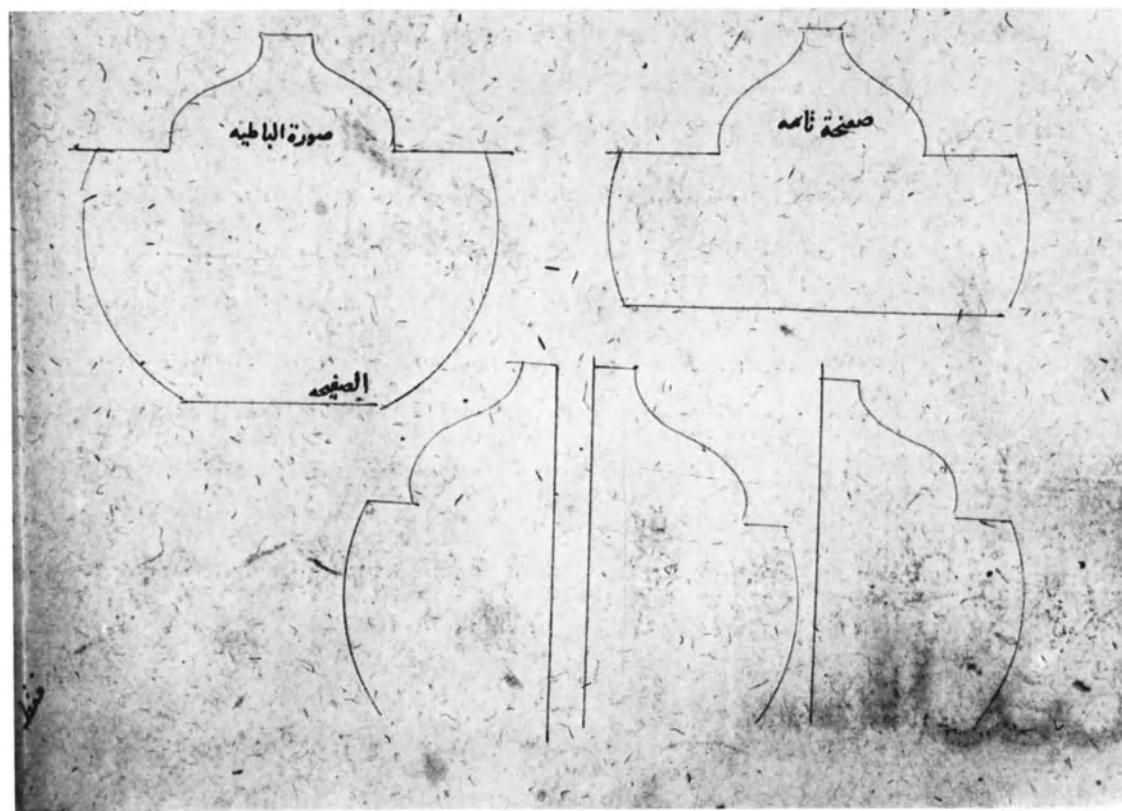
Caption reads: Right: 'complete plate'; left upper: 'drawing of the pitcher'; left lower: 'the plate'.
